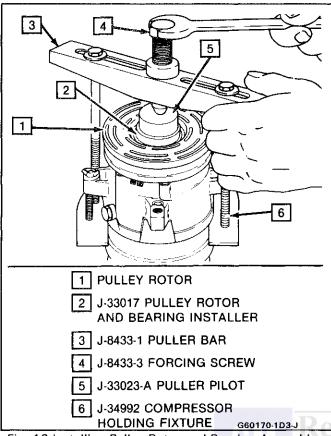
Installing Pulley Rotor and Bearing Assembly
